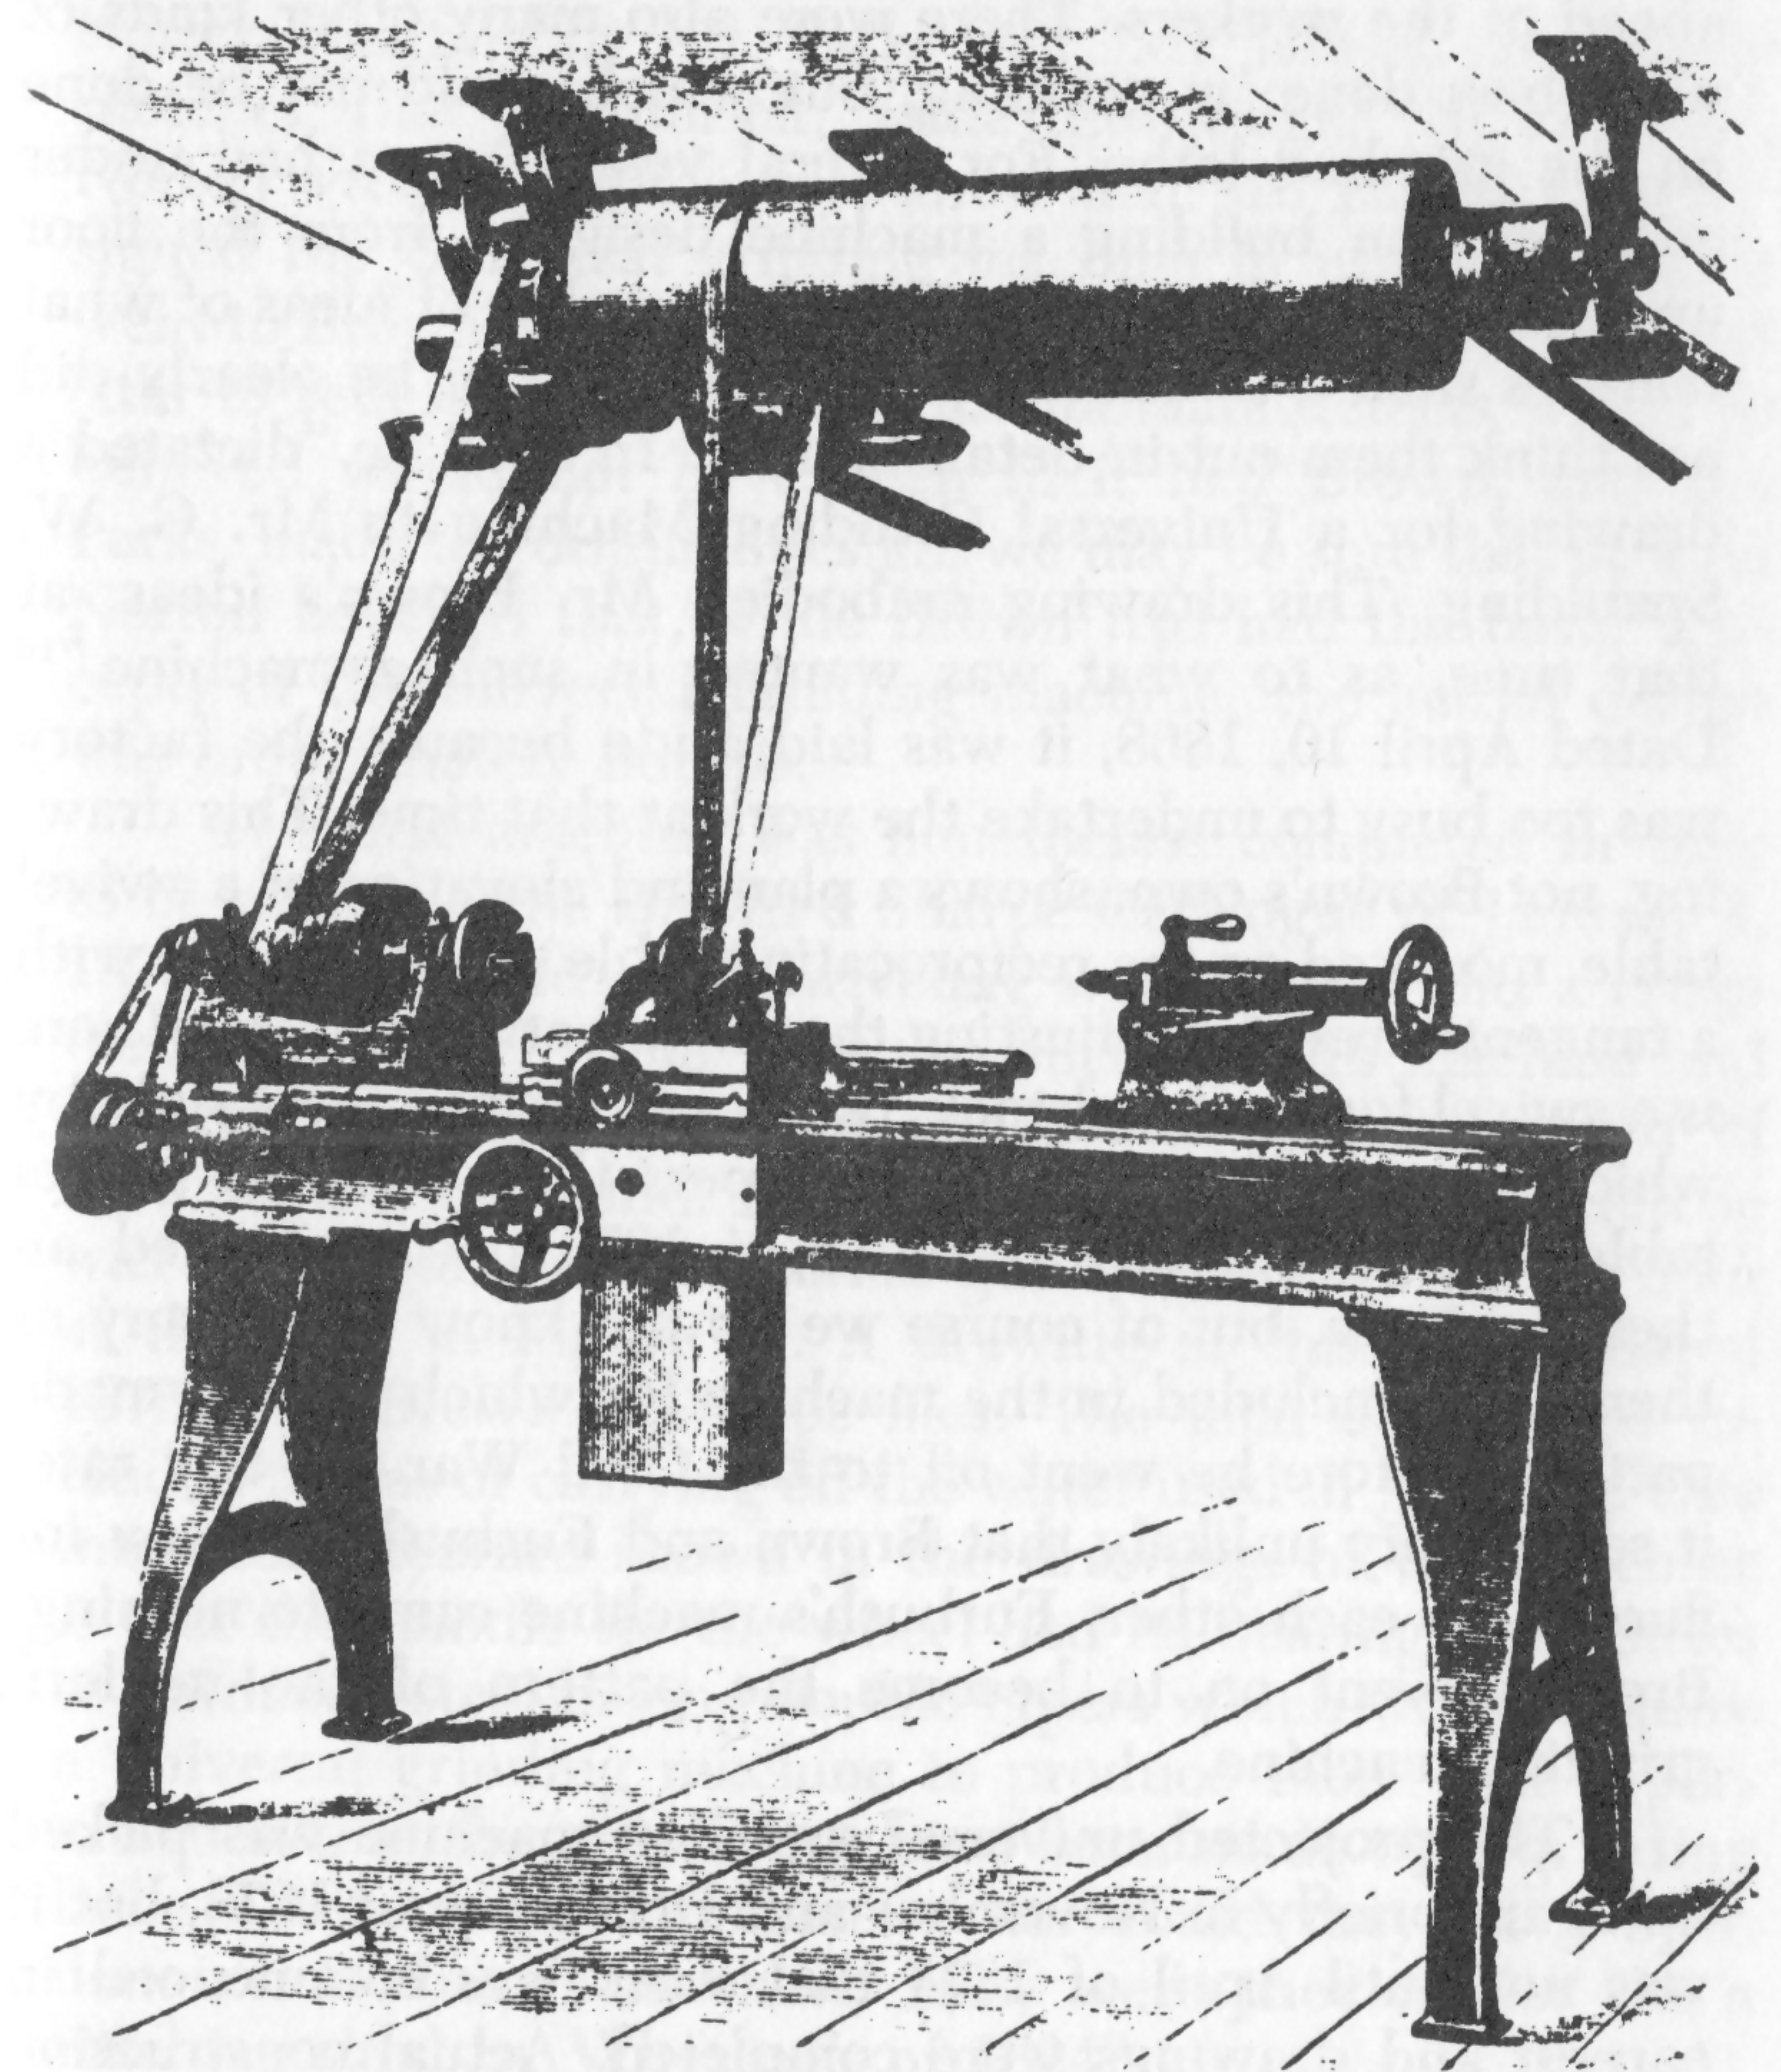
GRINDING LATHE, ABOUT 1867 (*Pratt & Whitney*)
